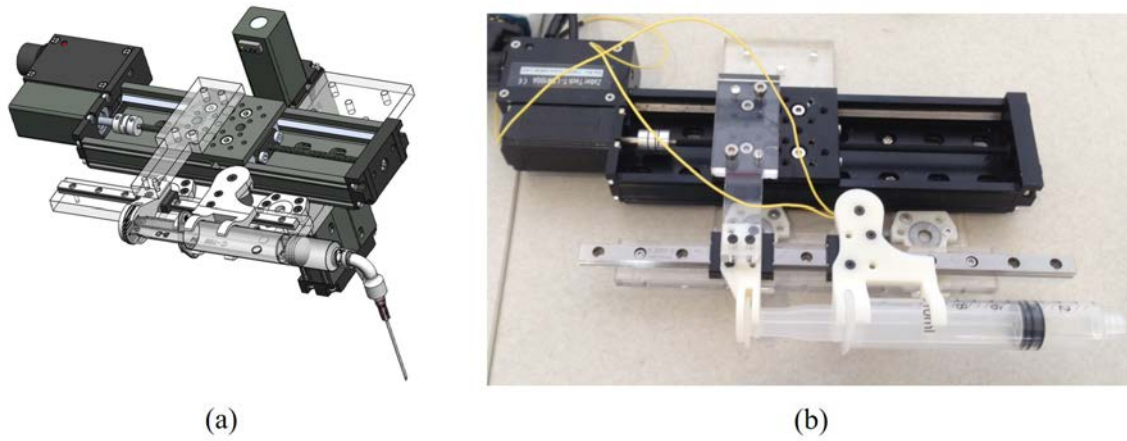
(a) Design and (b) prototype of the initial syringe pump.
